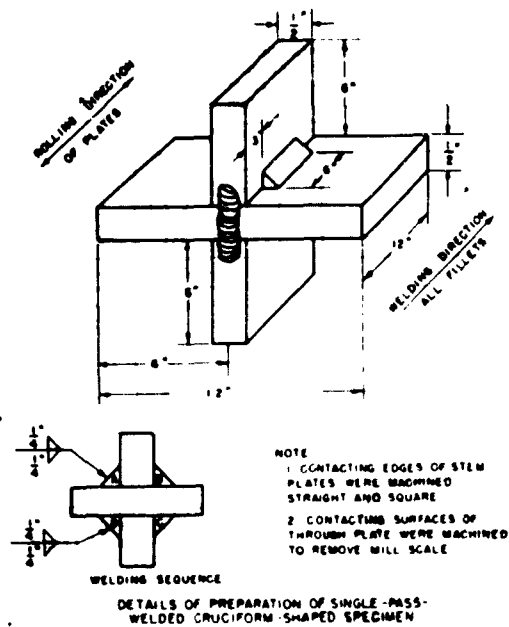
Details of Preparation of Single-Pass Welded Cruciform-Shaped Specimen
